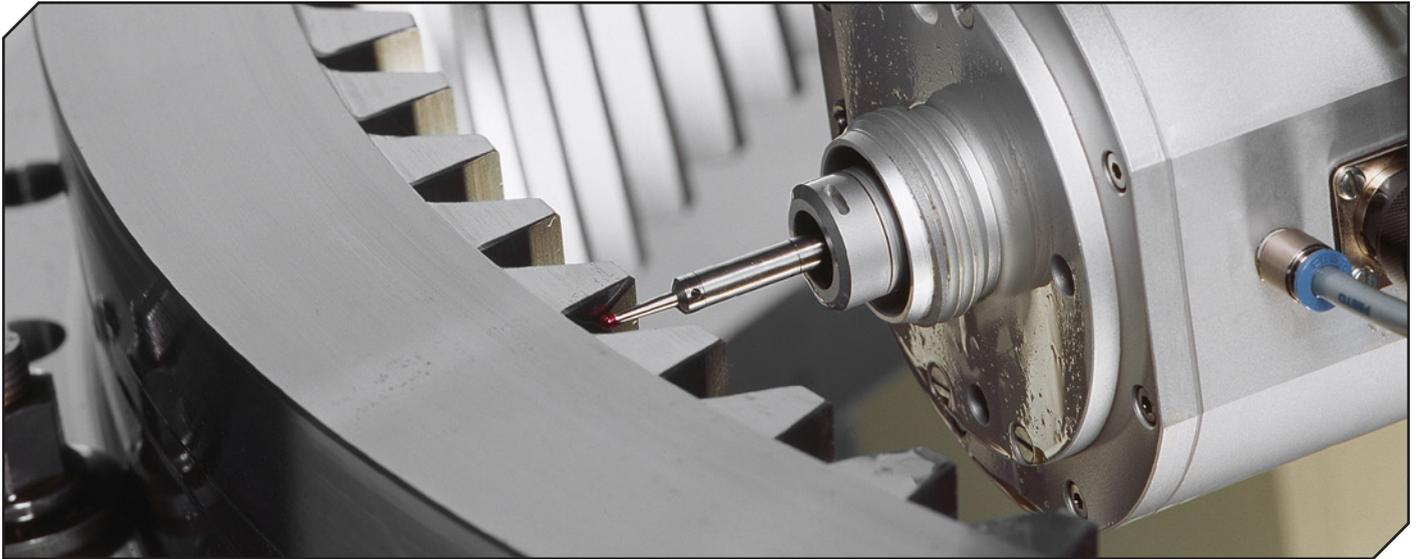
On-board inspection of both internal and external gears is fully integrated on Gleason machines.
